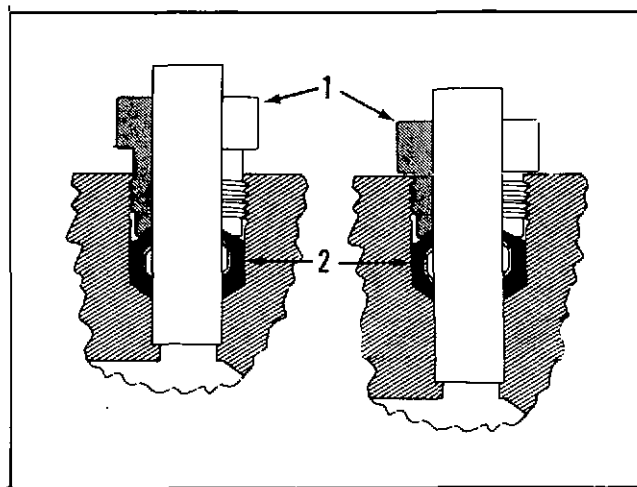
(F60291). Sealastic fuel tubing fitting in the fuel block
